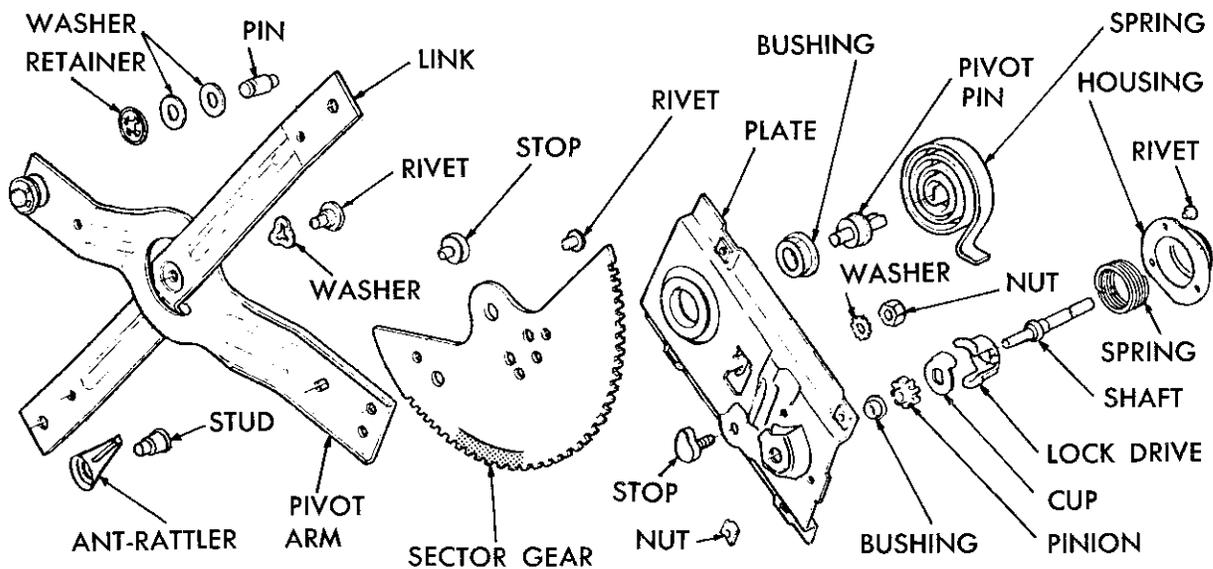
Rear Door Window Regulator (Exploded View) (DeSoto, Chrysler)
